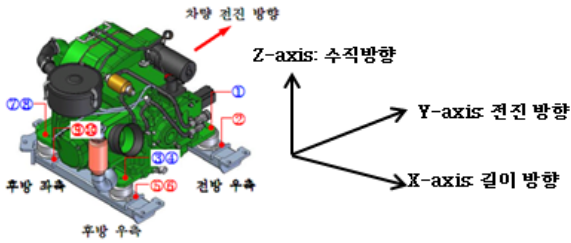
Installation position of acceleration sensor on APU engine and measuring axis
